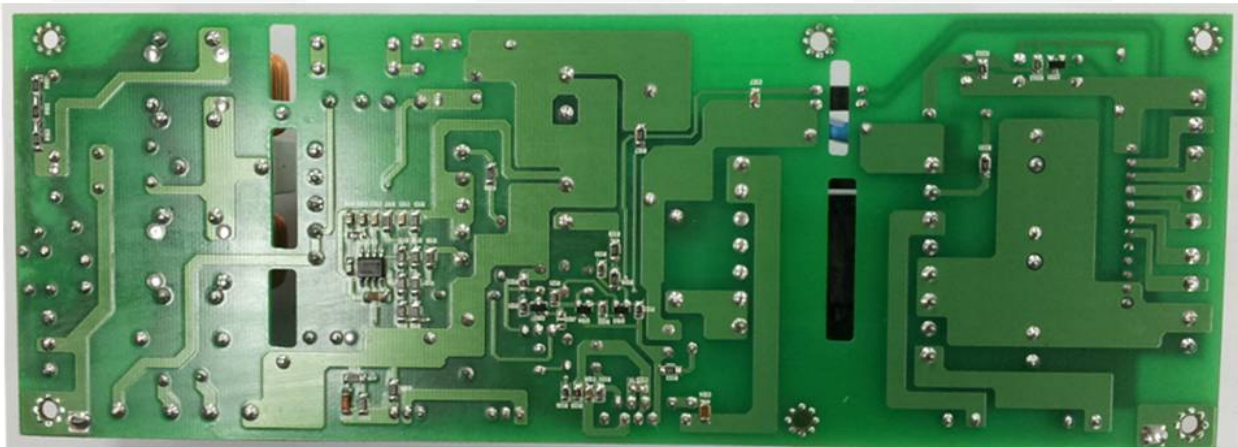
Bottom Views (Dimensions: 225 mm (L) x 80 mm (W) x 30 mm (H))
